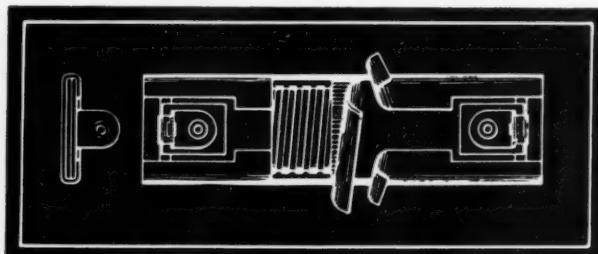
Construction details of a strip heater for conduction applications showing heating wire case and insulation
